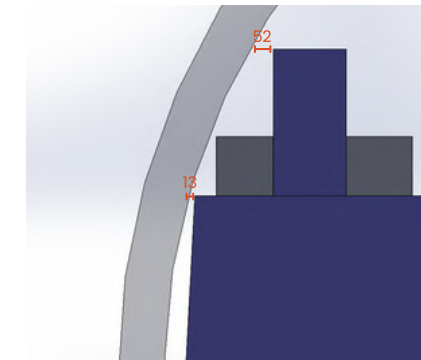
Dimensions seat to fuselage (without fillet in top) in mm, P95
